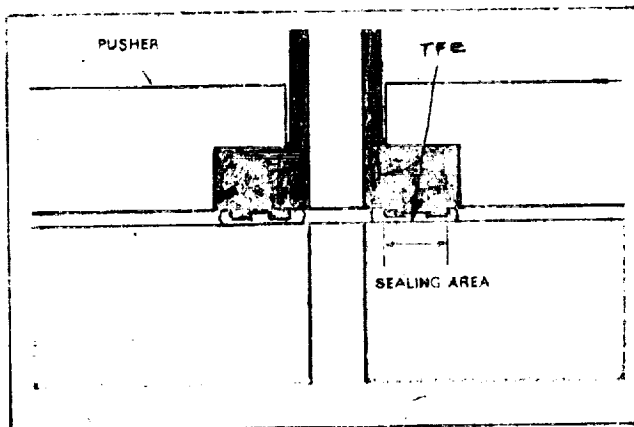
TFE seal between two flat surfaces would fail because of porosity and excessive flow of TFE under pressure. Land-and-groove seal copes with this problem. As lands squeeze into gasket, TFE is forced into groove under pressure. For 0.25-mm-thick gasket, groove would be 0.15 mm deep.
